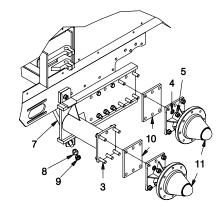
Mounting Spacer Plates, Hubs & Truss Rod
